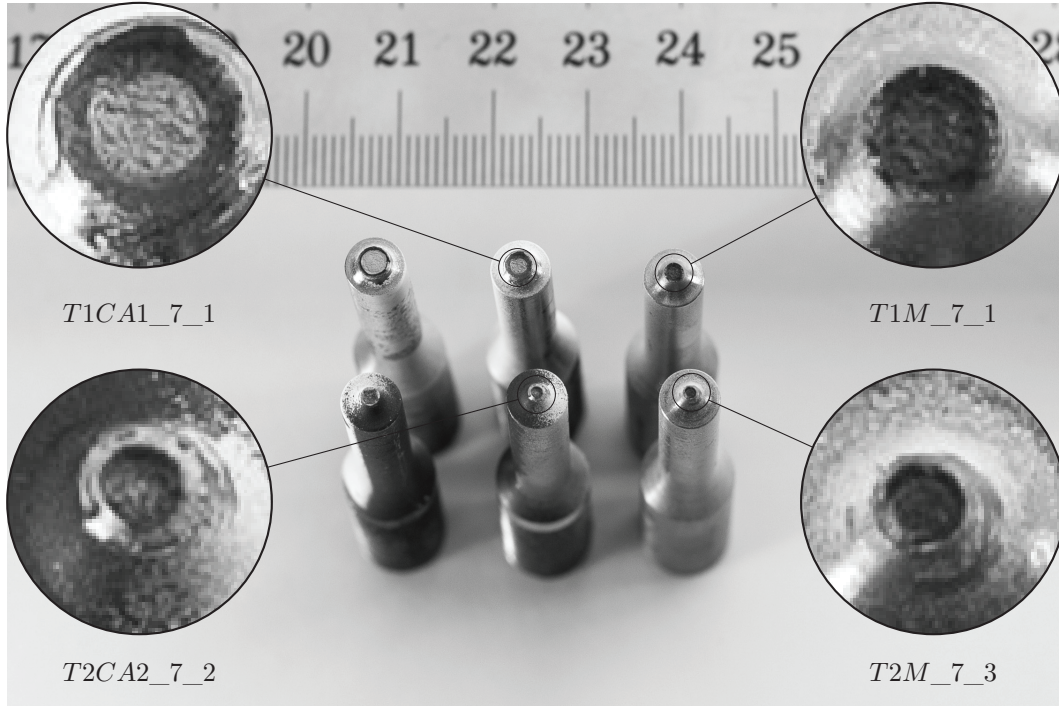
Single notched specimen fracture surfaces
